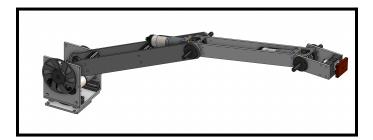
CAD model of arm assembly near maximum extension. The assembly does not reflect our current turret system, brake caliper, or grasper.
